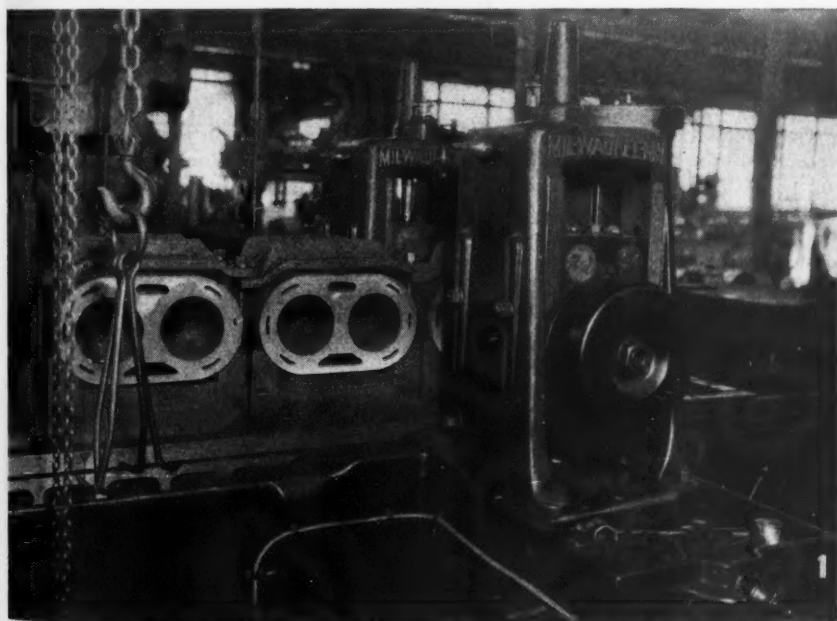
The ends of the cylinder blocks are machined in a Milwaukee miller.
